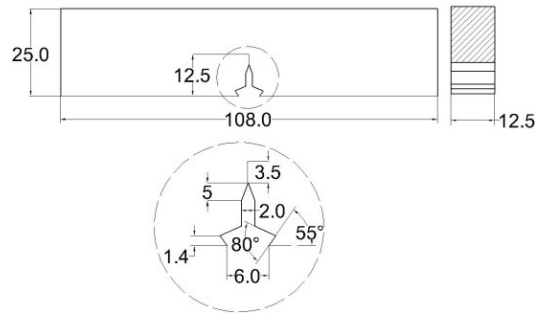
Dimensions of the SENB specimen for the standard fracture toughness test
